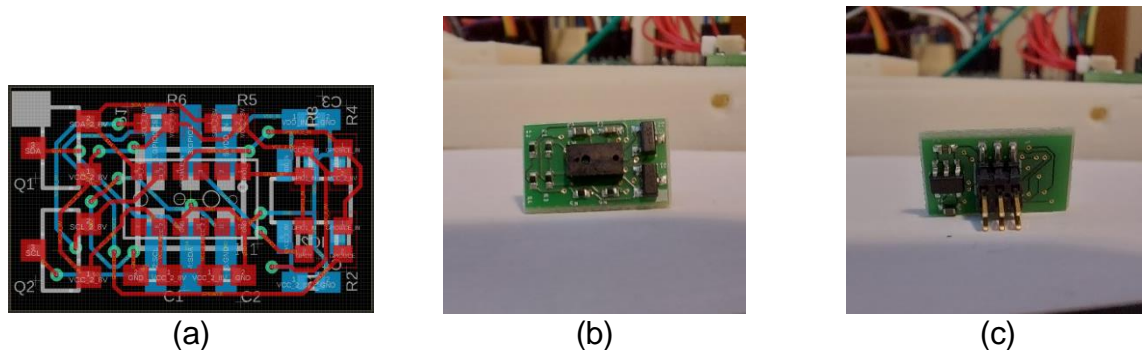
Proximity sensor module: Eagle view of the PCB (a), top (b) and bottom (c) view of a realized module.
